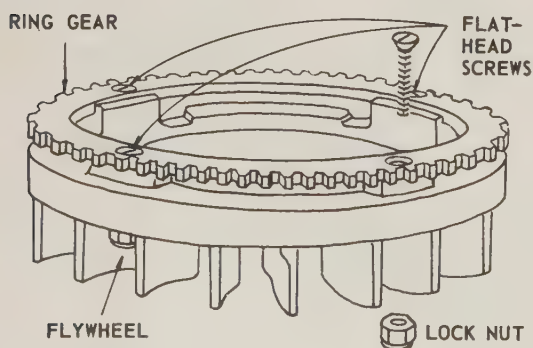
Method of replacing ring gear in one model of small engine. The old ring gear is removed by drilling out the attaching rivets, and then the new ring gear is attached with screws and locknuts. (Briggs & Stratton Corporation)
